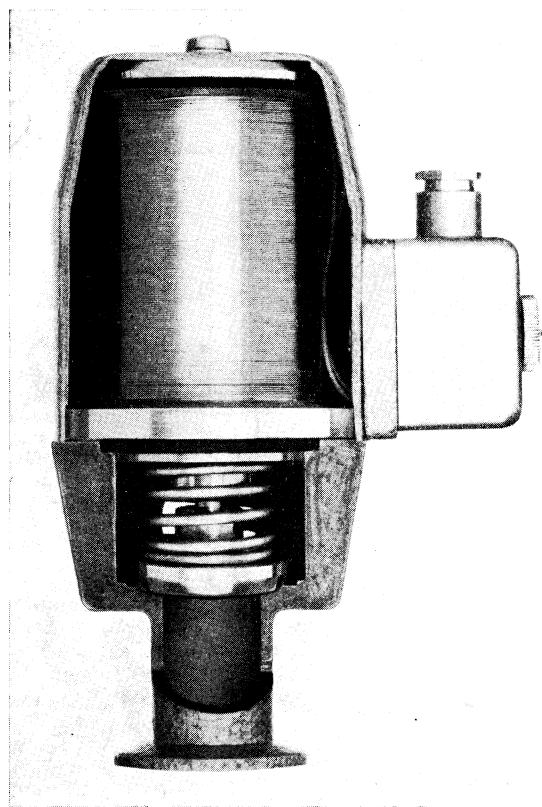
Sectional view of electromagnetic valve (*Courtesy of Leybold⁷⁶²*)
